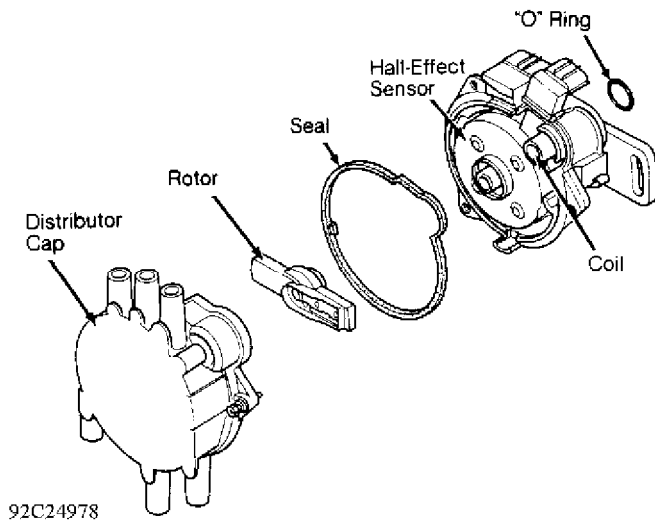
Exploded View Of Distributor (MX-3 1.8L, MX-6 2.5L & 626 2.5L)
